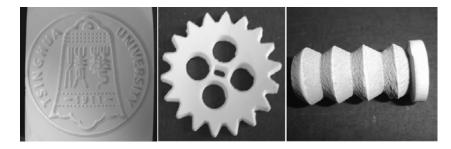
The complex-shaped sintered Al2O3 ceramic parts prepared by laser-machining [5]
